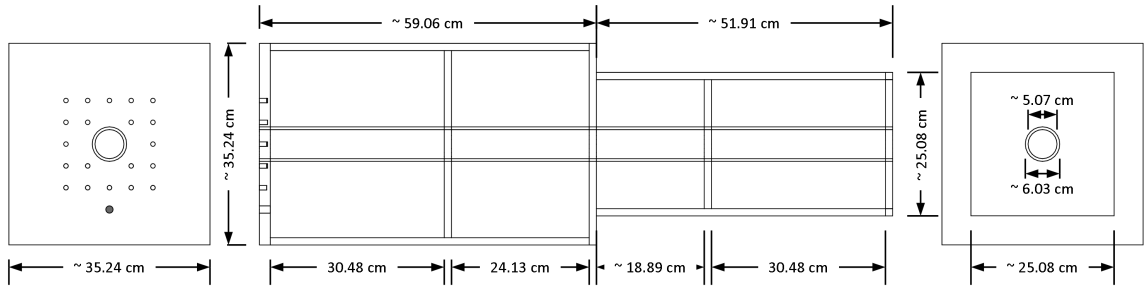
Collimator insert design and dimensions. Left: Outer face. Center: Side view. Right: Inner face.
